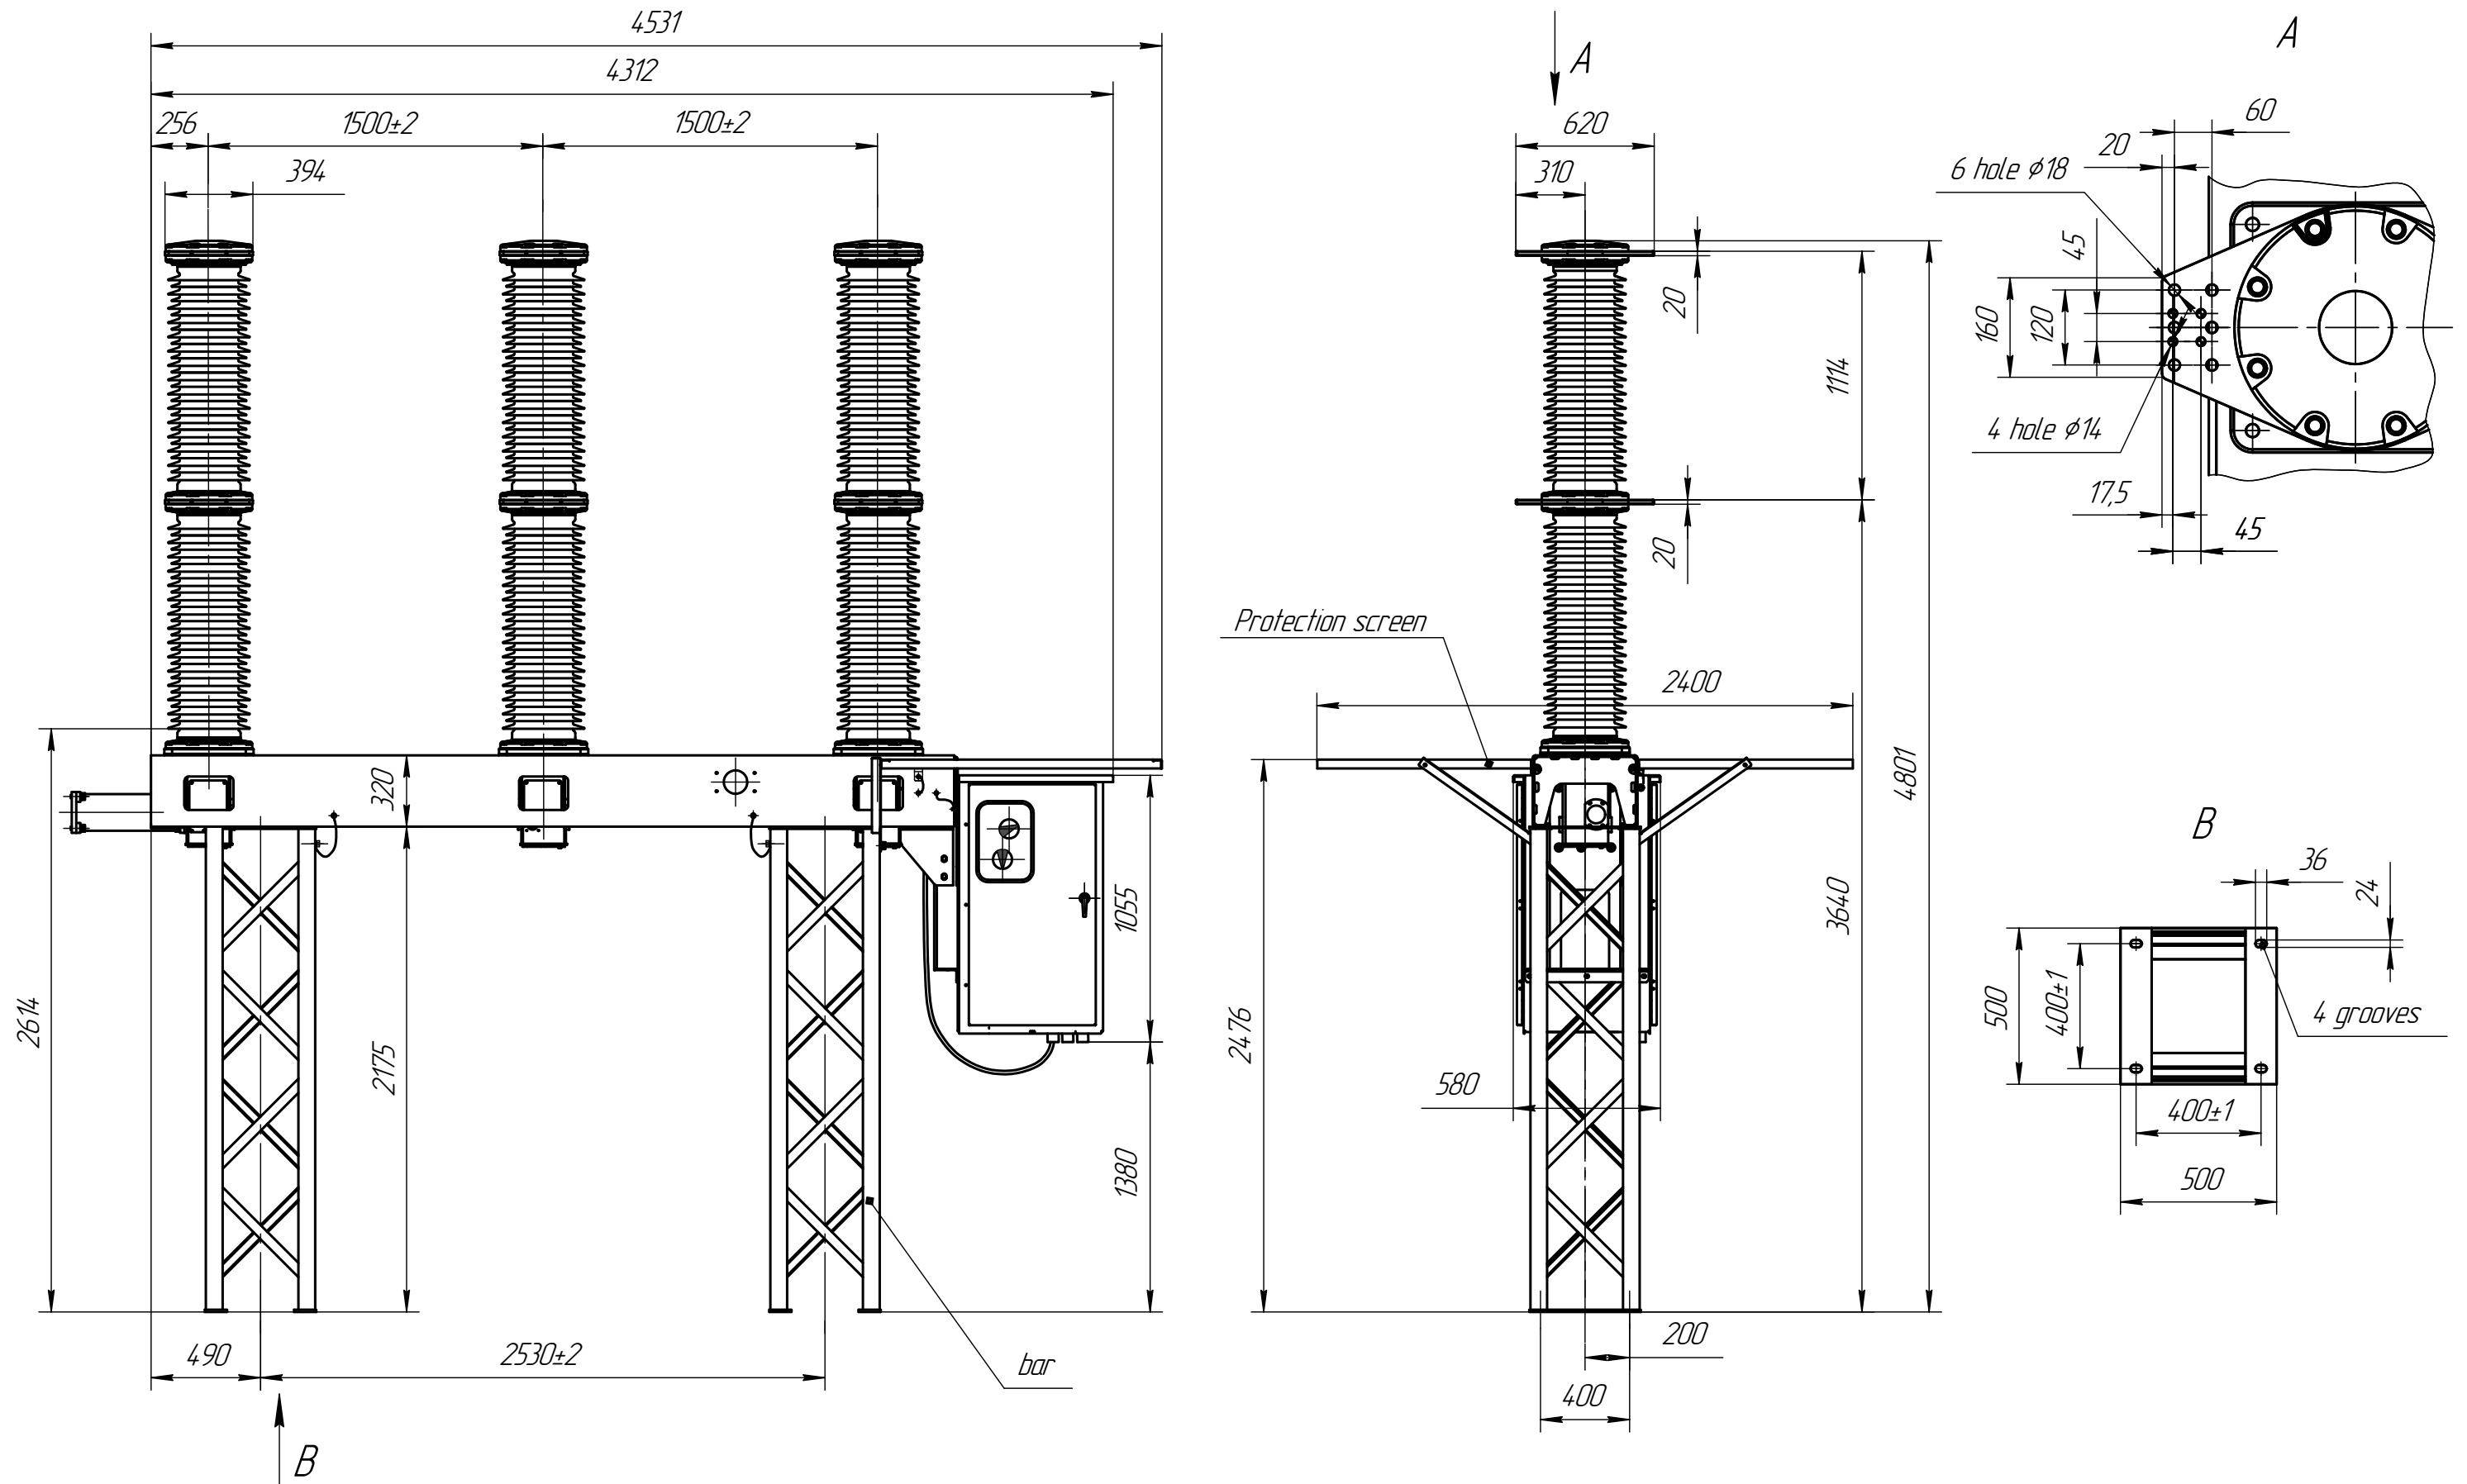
Overall, adjusting and adjoint dimensions of the vacuum circuit breakers type BPC-110 III-40/3150 9X/11
